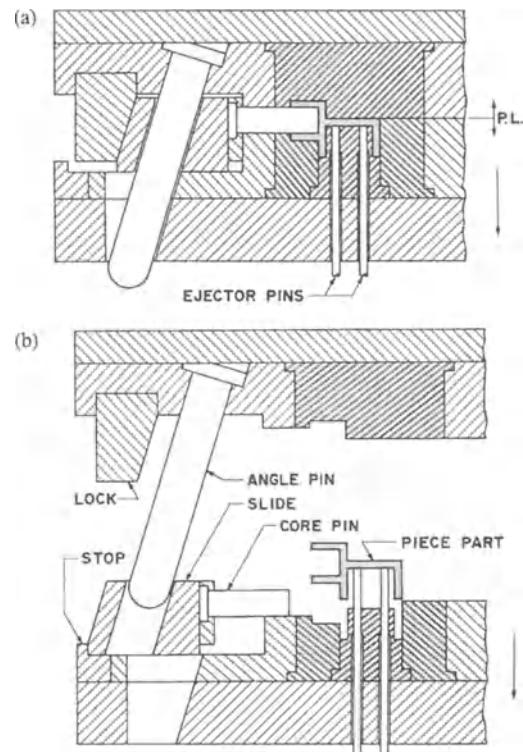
Example of an angle pin with (a) mold closed and (b) mold open.
